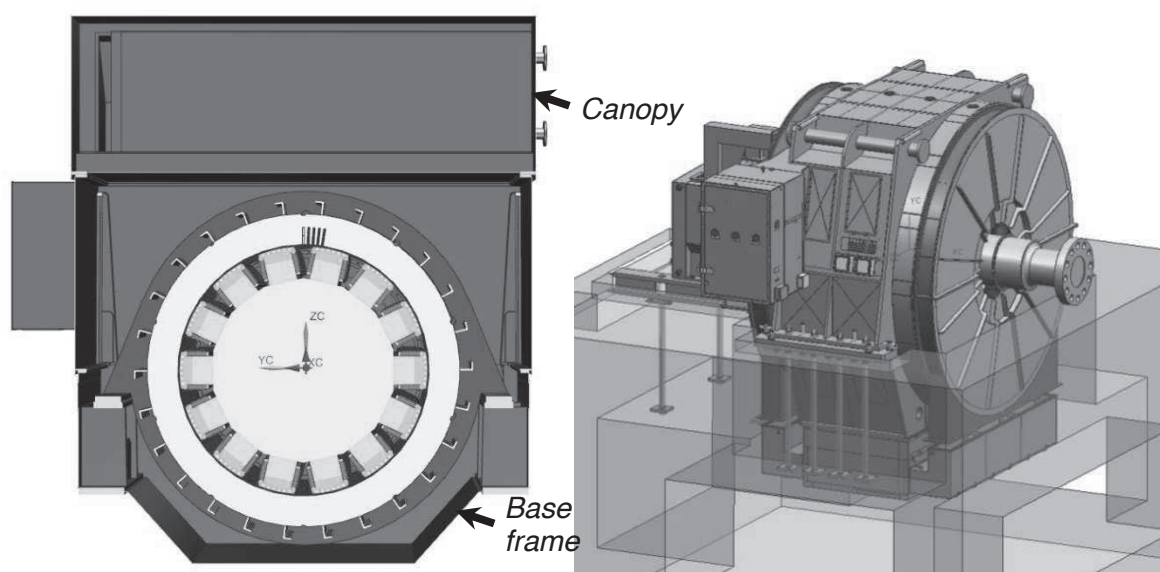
Left: Motor with separate subassemblies for the baseframe, the stator (dark blue/white) and the cover. Right: Motor comprising one assembly for the frame, the stator and the cover.
